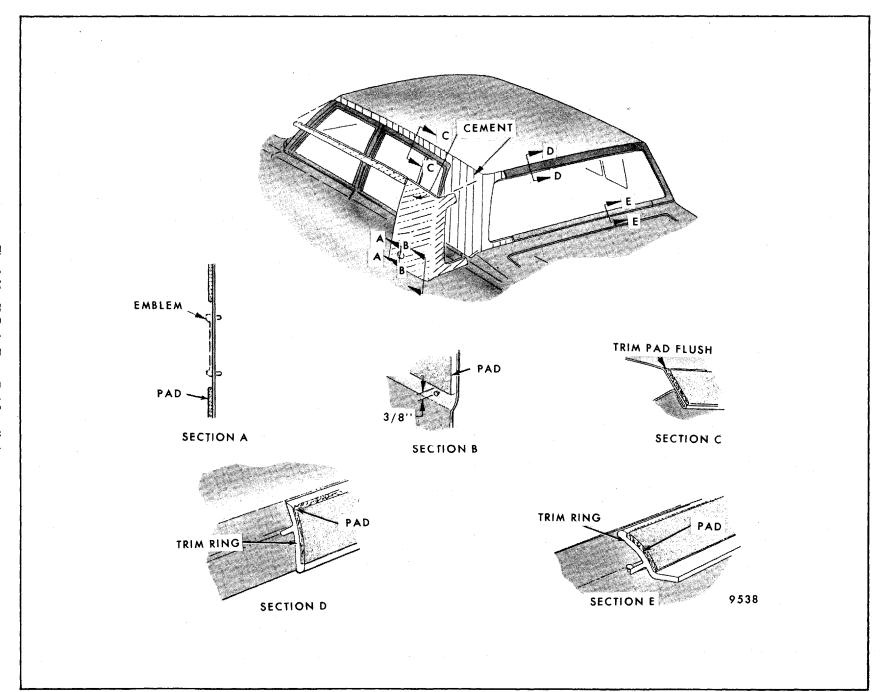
Typical Fabric Roof Cover Installation - F Styles - CB7 Option
